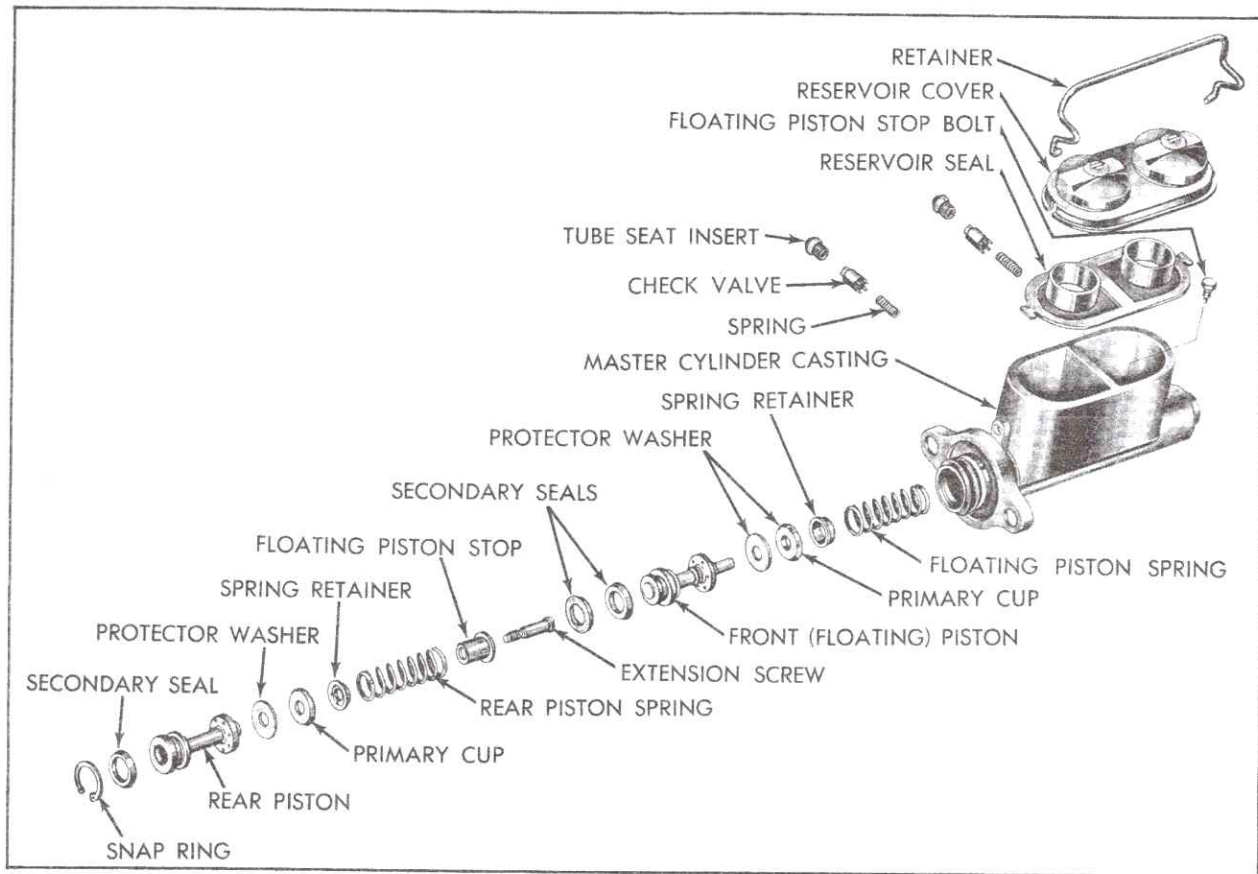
Delco Moraine Master Cylinder Disassembled
